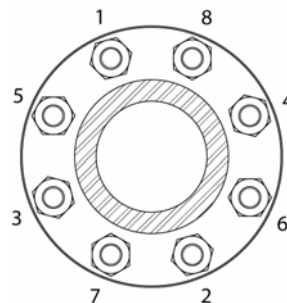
Bolt tightening sequence for flanges using 8 bolts
